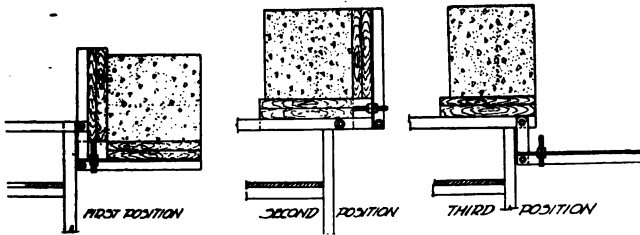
THREE VIEWS OF TURNING STAND FOR HANDLING GREEN CONCRETE BLOCK TO BE BRUSHED ON THEIR FACE SIDES
